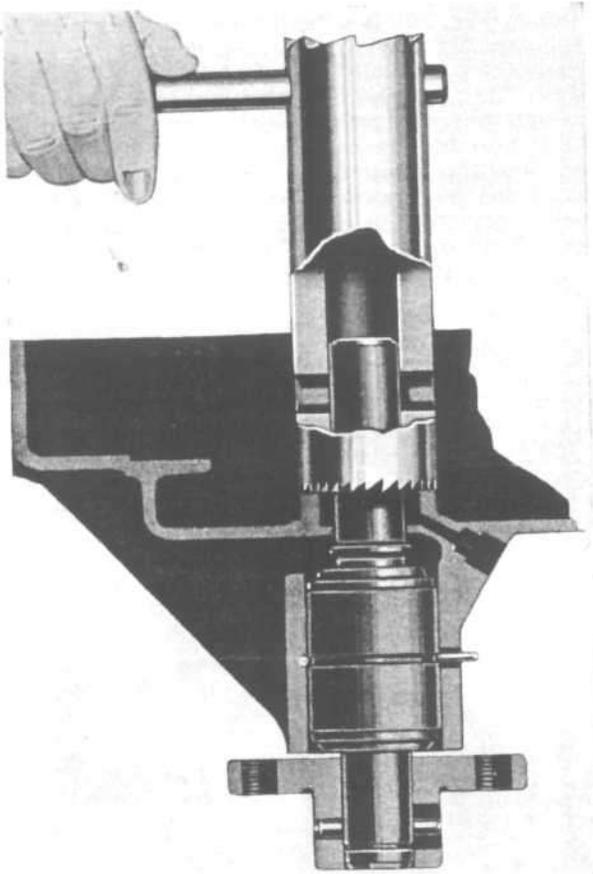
WATER PUMP HOUSING SEAT REFAKER
